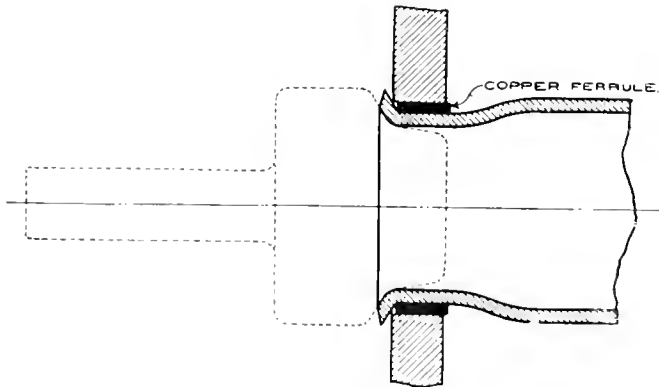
Flaring End of Flue at Firebox Sheet With Standard Flaring Tool.
